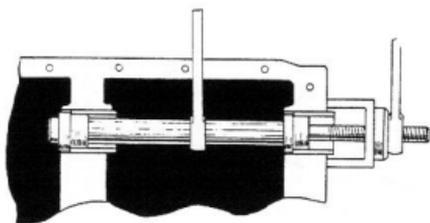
Measuring Camshaft Bearing Bore X4948
